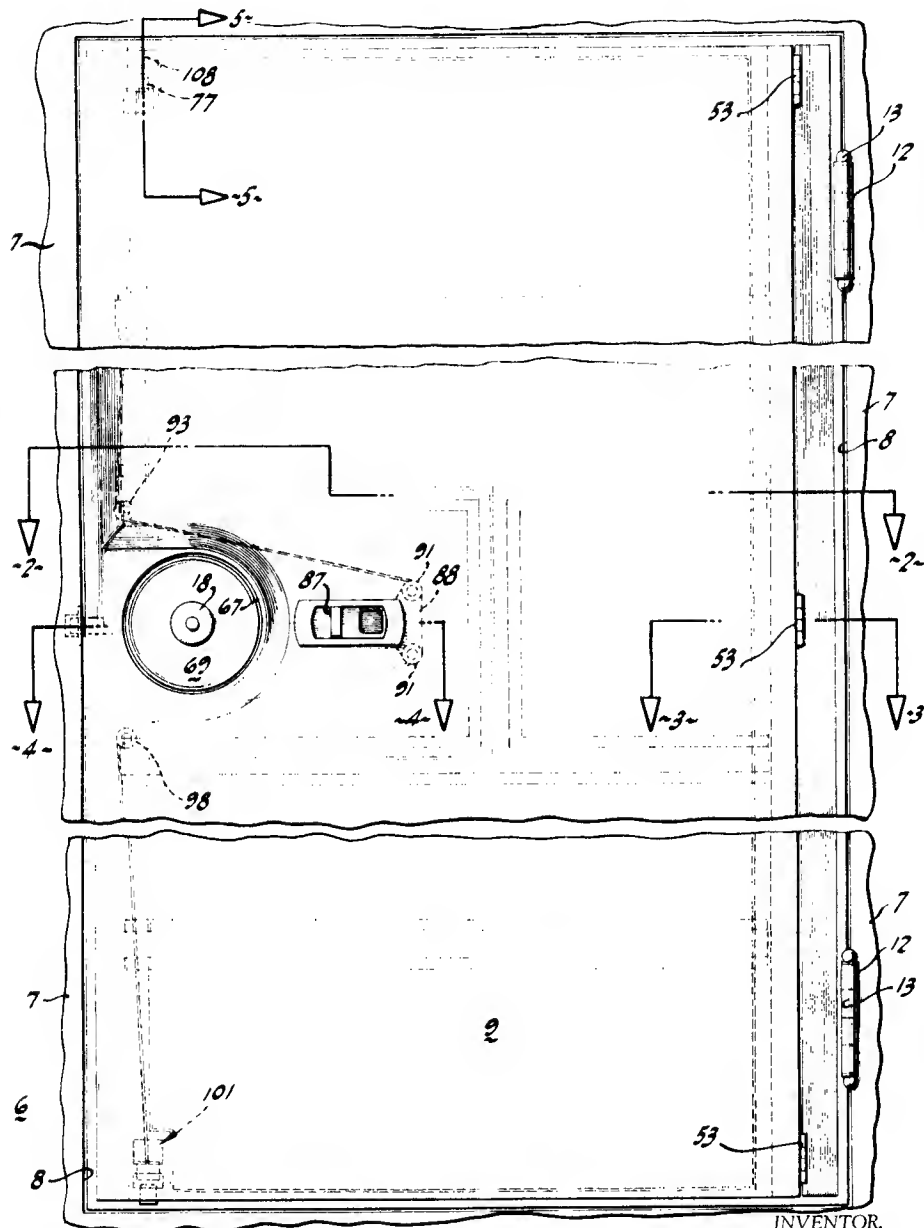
Side View of a Section of Schlage Service Door (Model no. 2) Showing Inner Door Latching Mechanism
